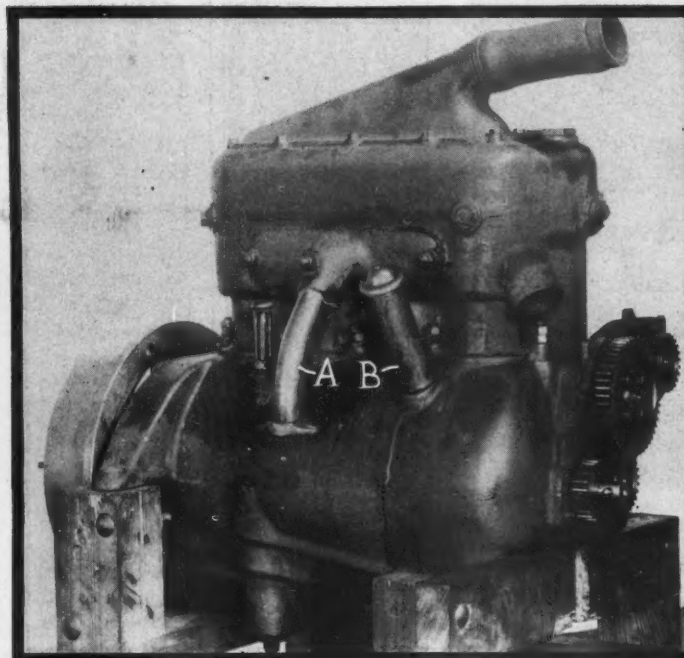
RIGHT SIDE OF R. C. H. MOTOR SHOWING INTAKE A FROM CARBURETER IN CRANKCASE COVER AND OIL FILLER PIPE B
